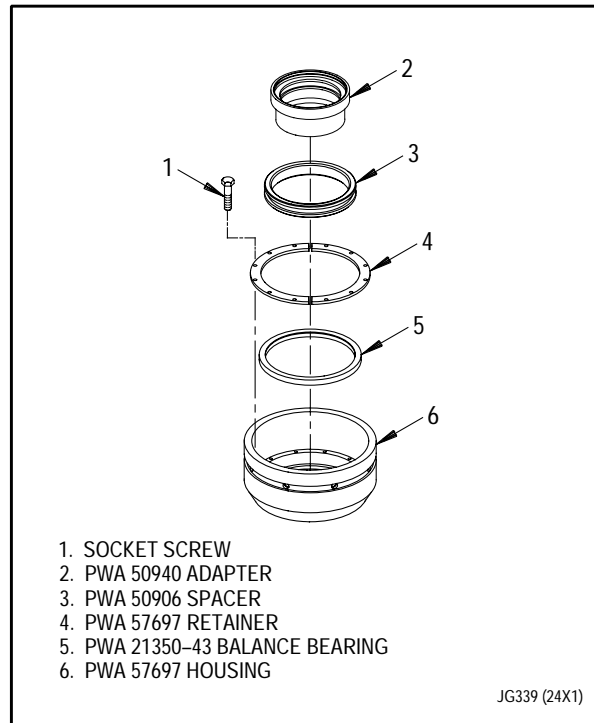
Rear Compressor Rotor Assembly Front Hub Balance Bearing - Removal
